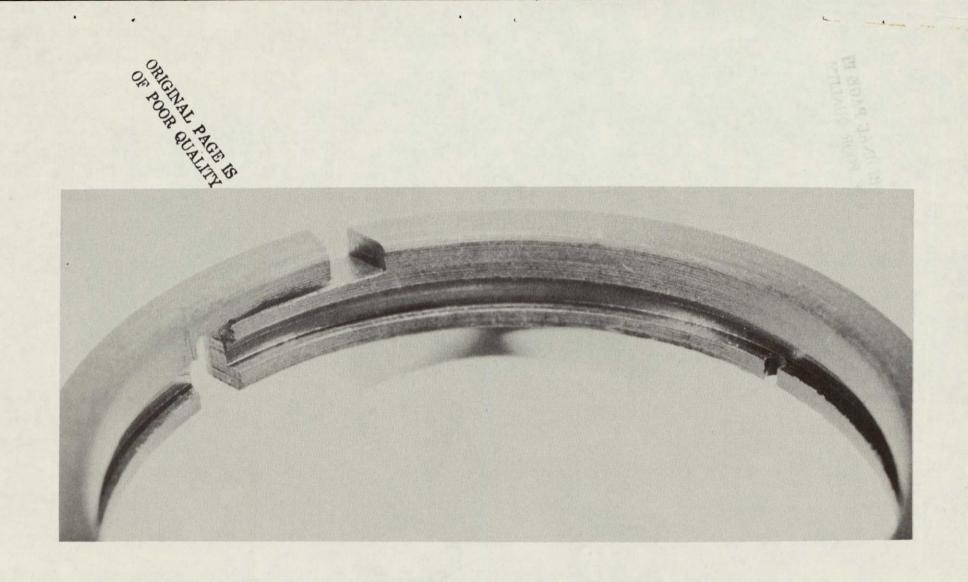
Spiral Groove LOX Seal Piston Ring (A28-0812-12-7456- Rev. C, S/N 03, Build 14, Posttest 749)
